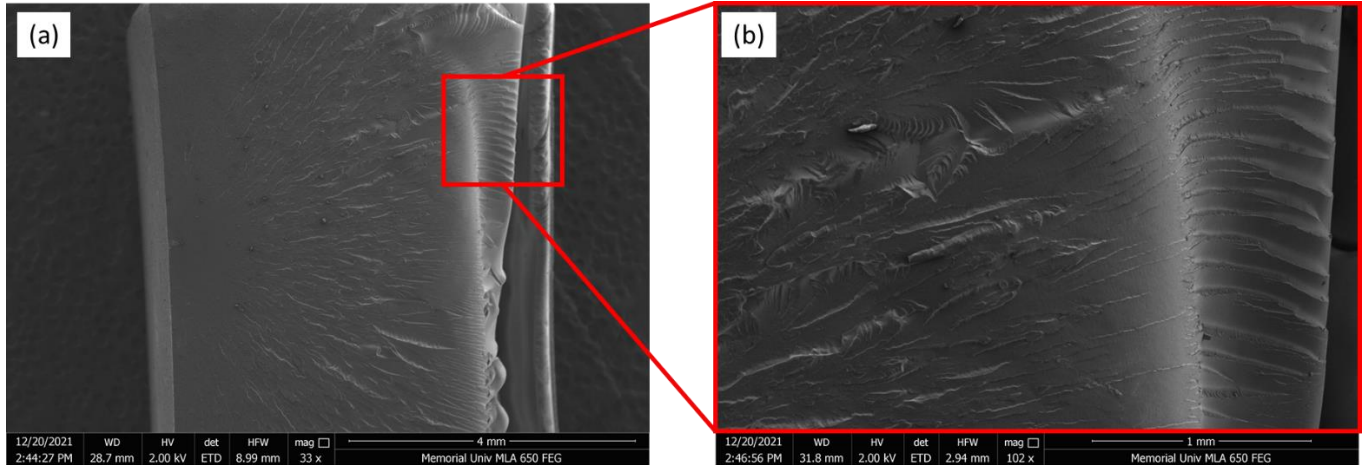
Specimen P5 fractured surface investigation using scan electron microscopy (a) lower magnification (b) higher magnification
